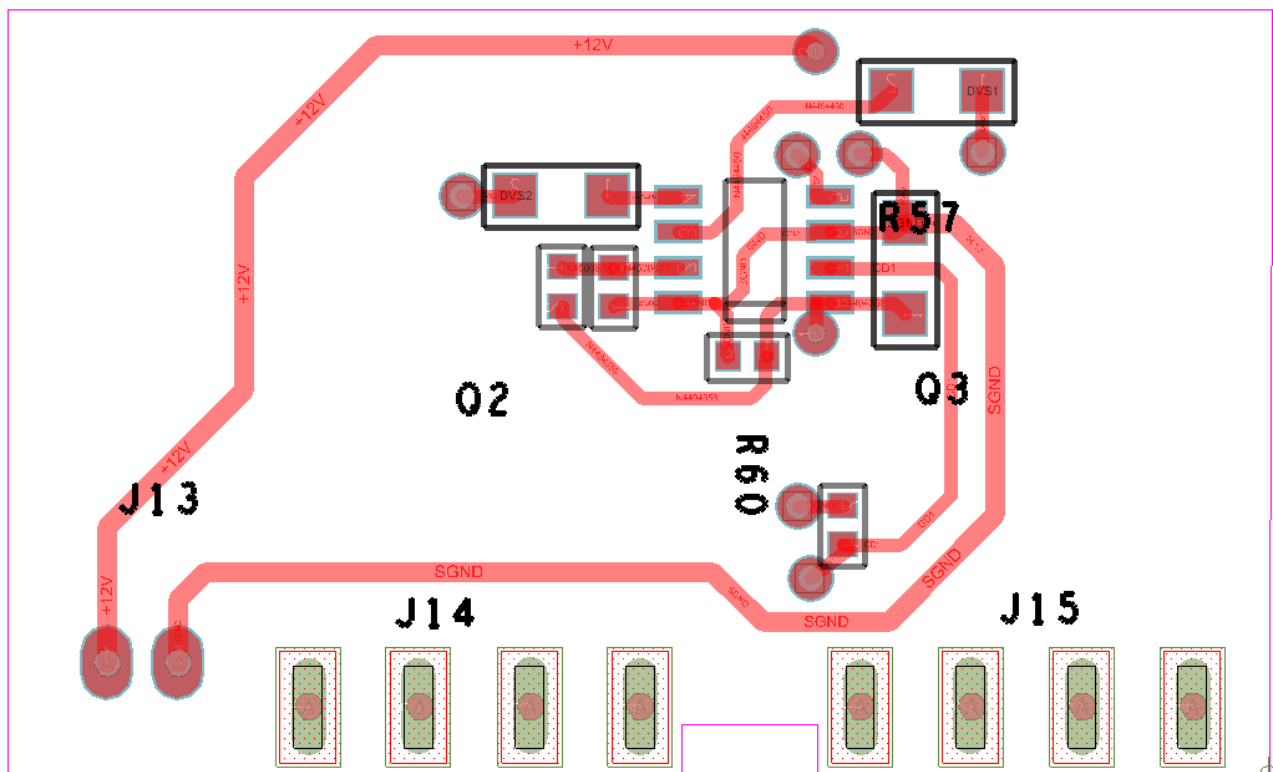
Printed Circuit Layout – Daughter Board, Bottom Side.
